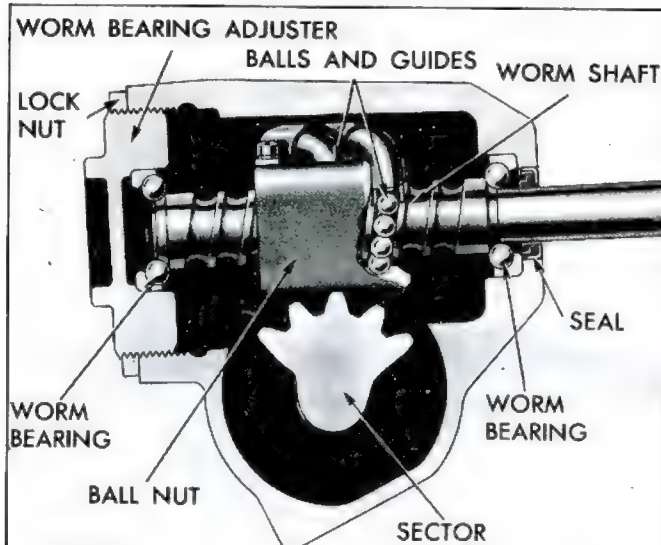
Steering Gear Worm and Ball Nut Circuits
